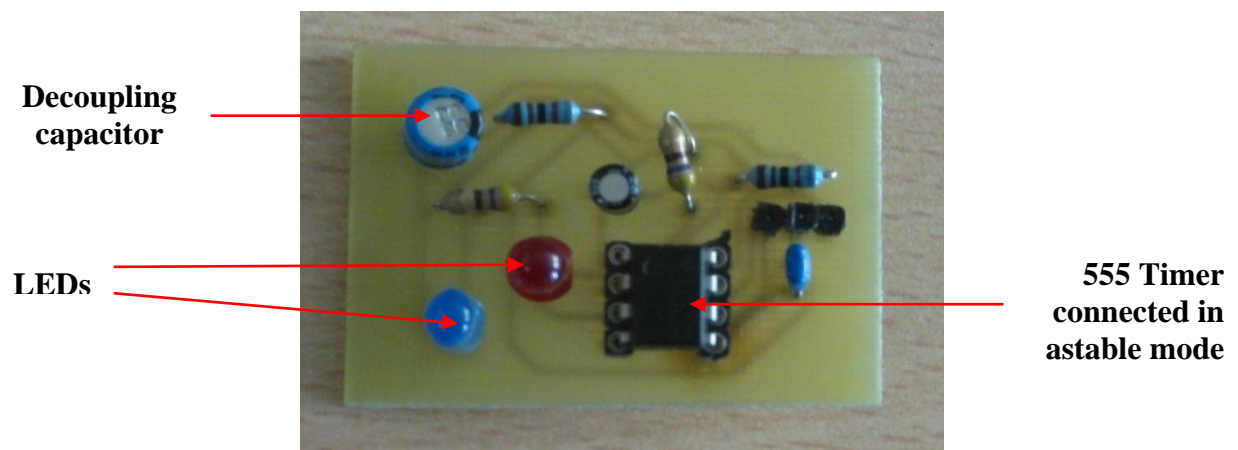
Assembled printed circuit board for the flashing LED user alert system
